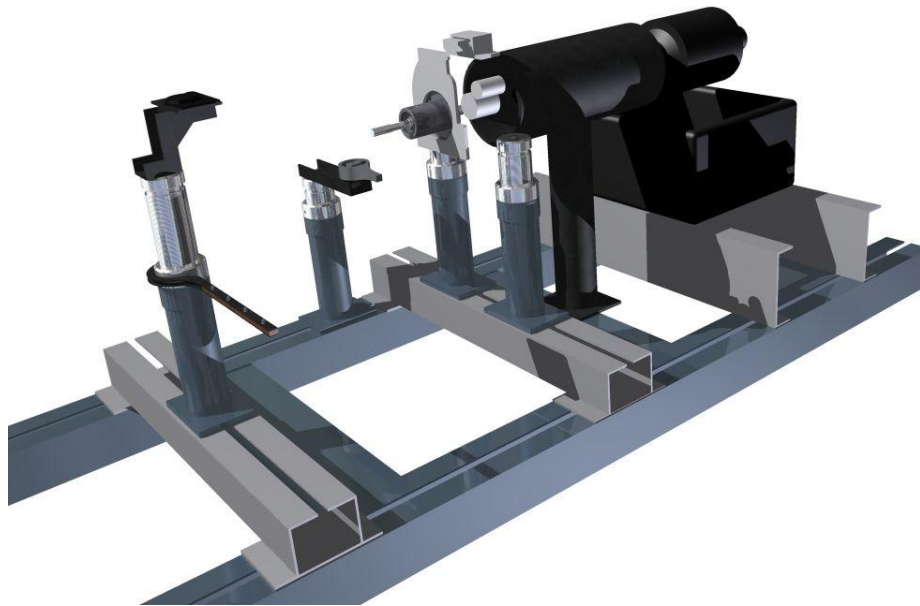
CAD MODEL FOR ACCURATE MOUNTING OF THE ENGINE
